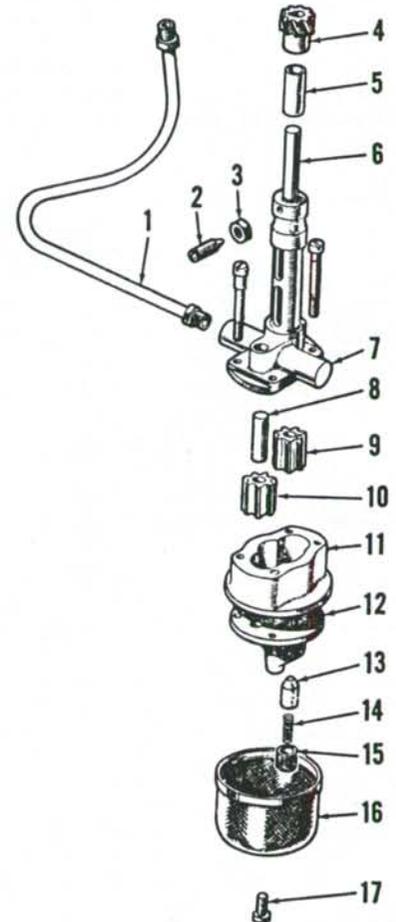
Exploded view of oil pump used on four-cylinder engine showing component parts and their relative positions.
